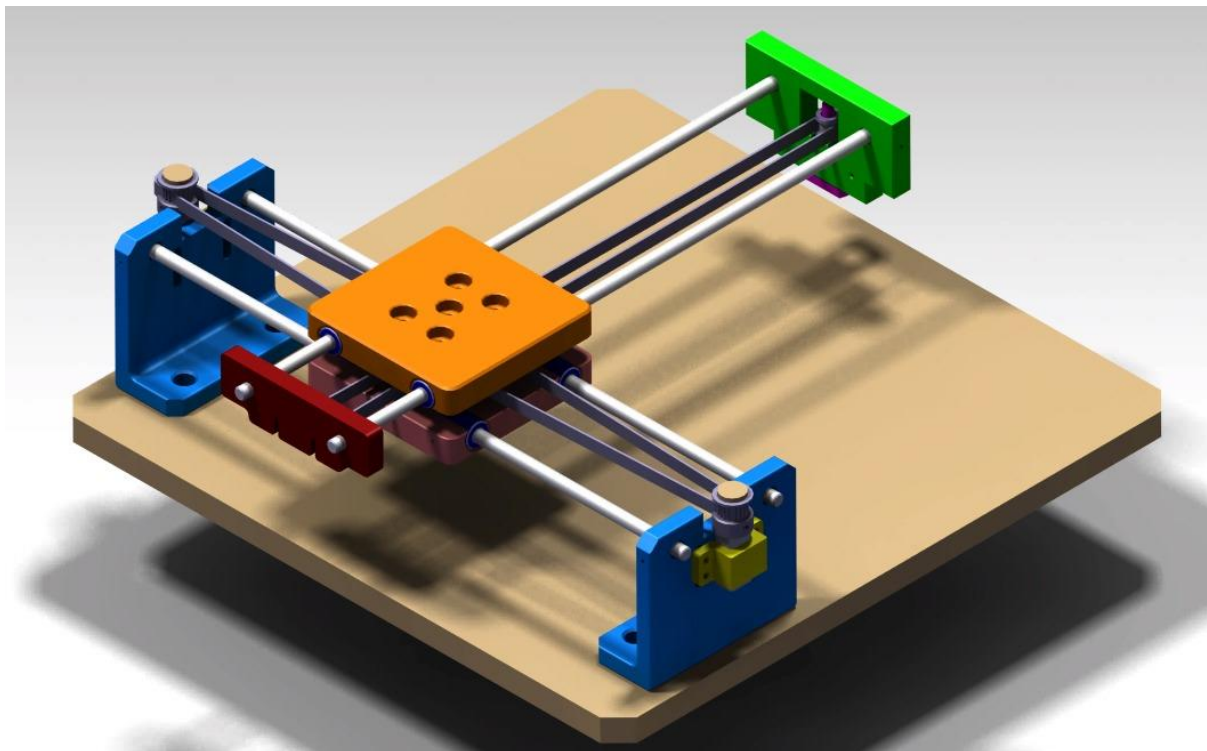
3D Printed Support Structure Assembly of XY Pen Plotter
